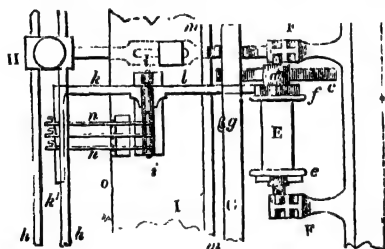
Mechanism of Silk Doubling Mill —Plan.
